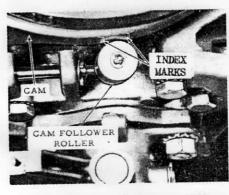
View of the cam follower centered between index marks on speed control cam. Cam attaching screws are on under side.
